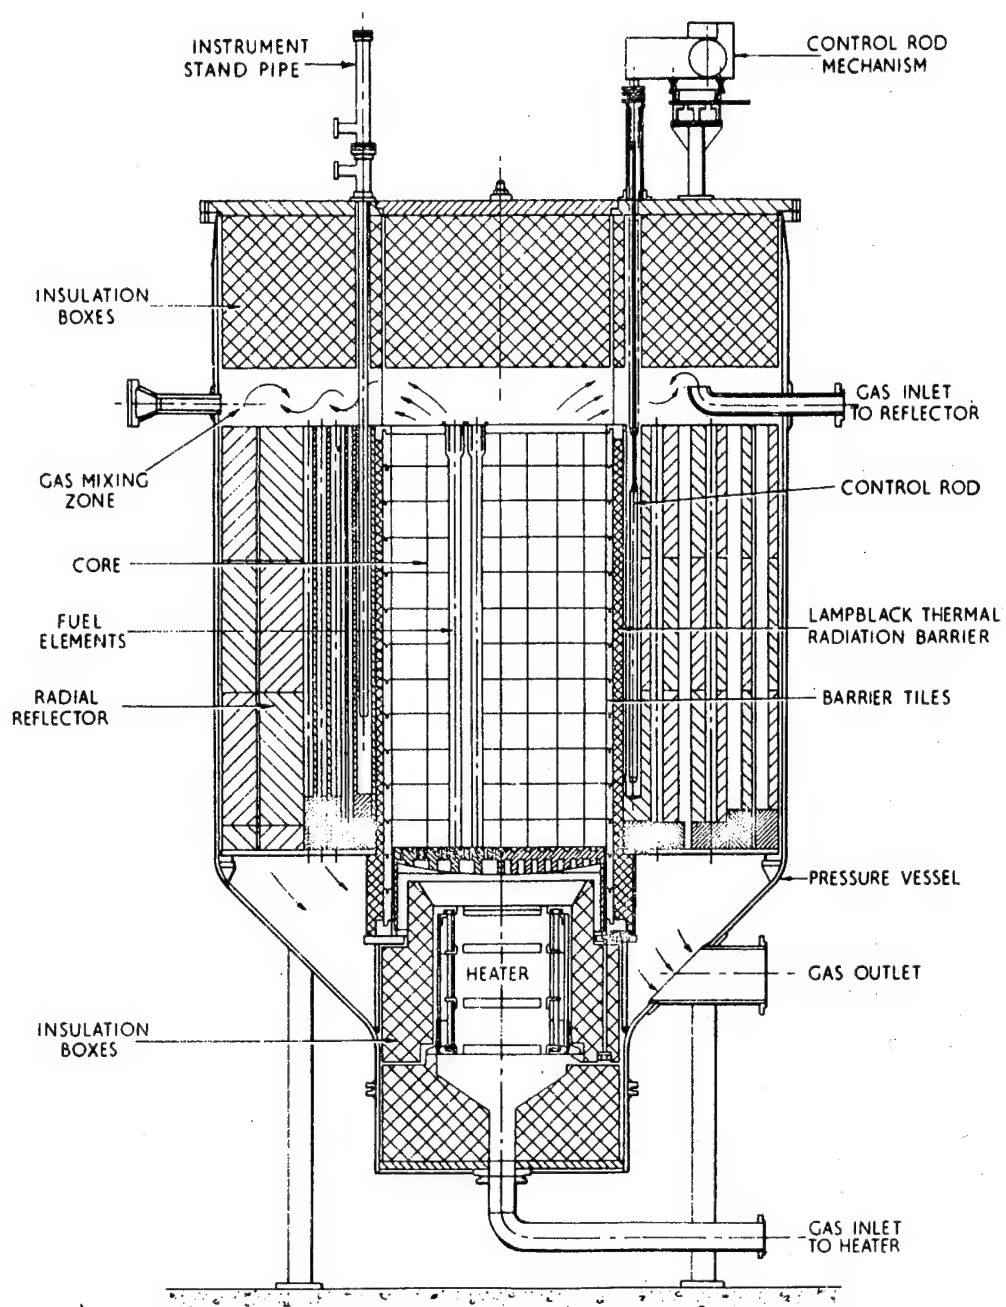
SECTION THROUGH REACTOR VESSEL
